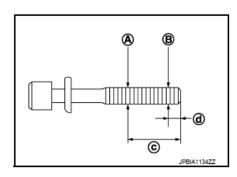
Identifying Cylinder Head Bolts Outer Diameter Courtesy of NISSAN NORTH AMERICA, INC.
